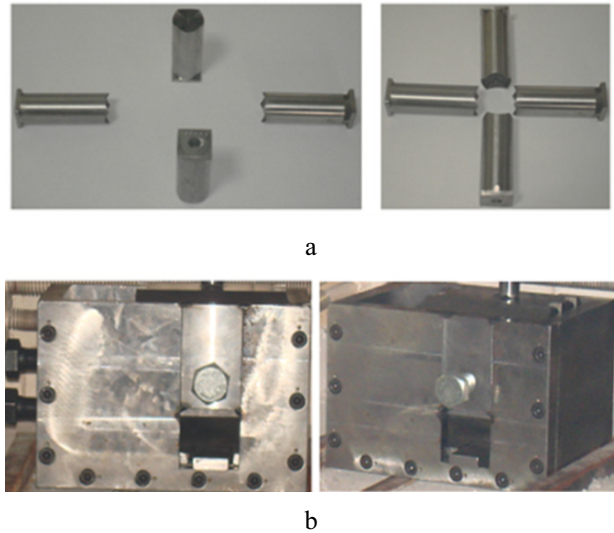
Die pins and die holder: a) designed and manufactured ECAP die pins; b) die holder
